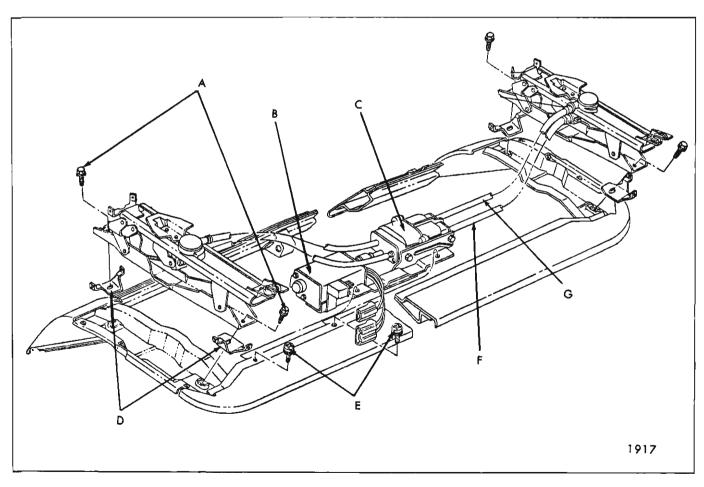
H6-Front Seat Assembly - Four-Way Tilt
